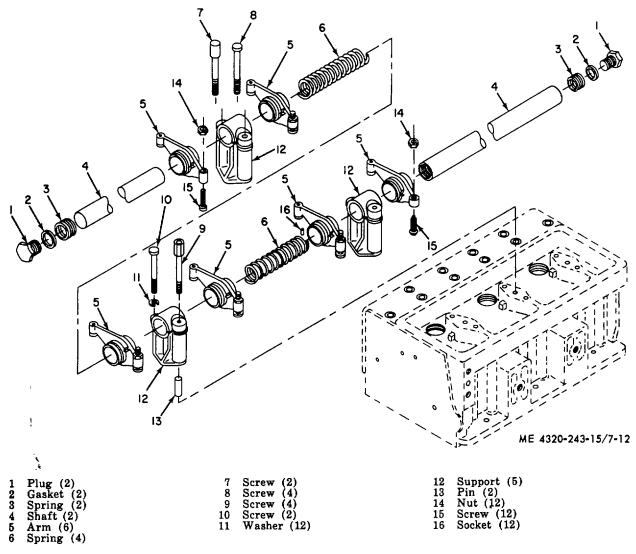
Rocker arm assembly, disassembly and reassembly.
